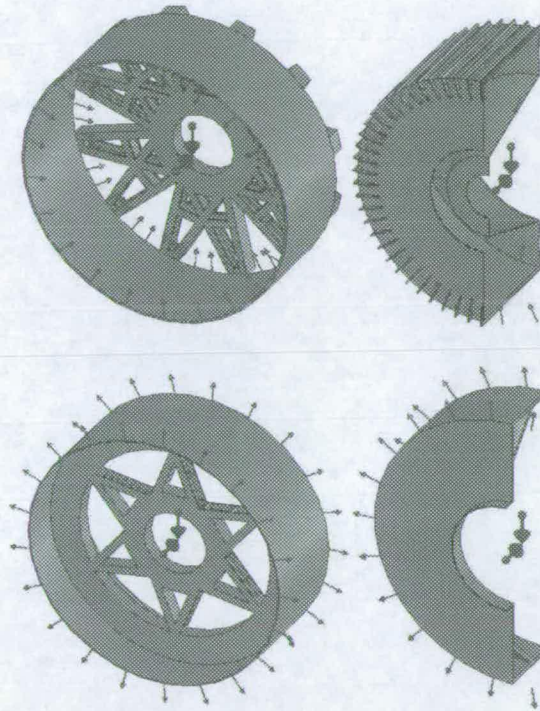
Radial-flux machine structure. Stator (left) and rotor (right).
